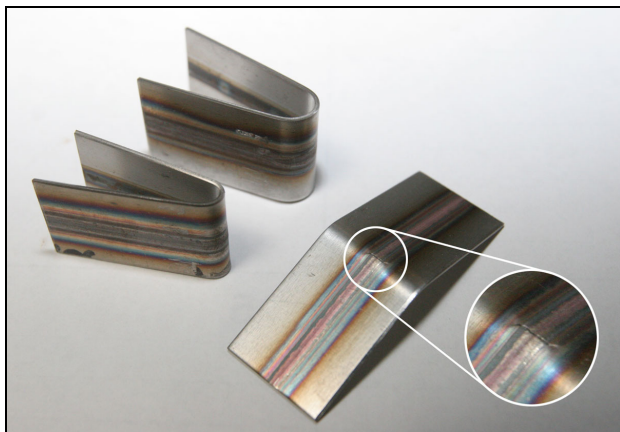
Typical ASTM E190 guided bend-test weld ductility specimens. From left: 2t bend radius-full bend; 4t bend radius-full bend; 4t bend radius-failure
